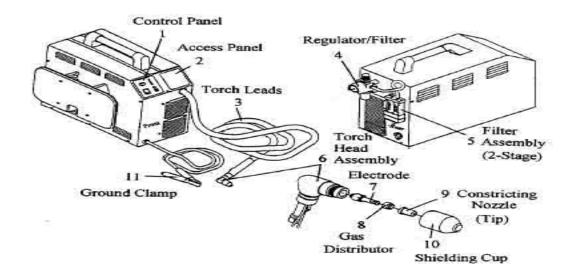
4 - plasma arc welding equipments. [D]
